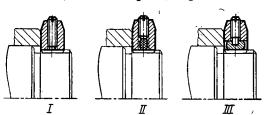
Locking circular nuts with set screws I—directly; II—through inserts of soft materials
